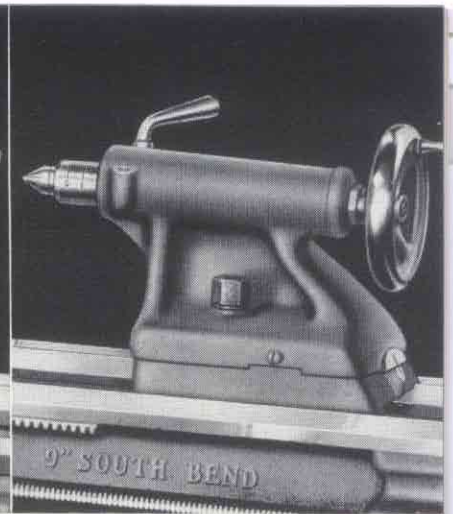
Tailstock Design Used on 9" Swing Lathes
